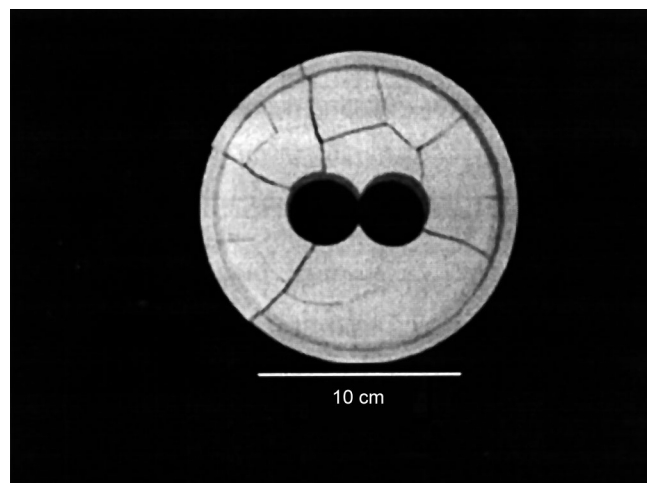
Failure of alumina gel-cast part after sintering at 1450°C because of knit lines therein.
